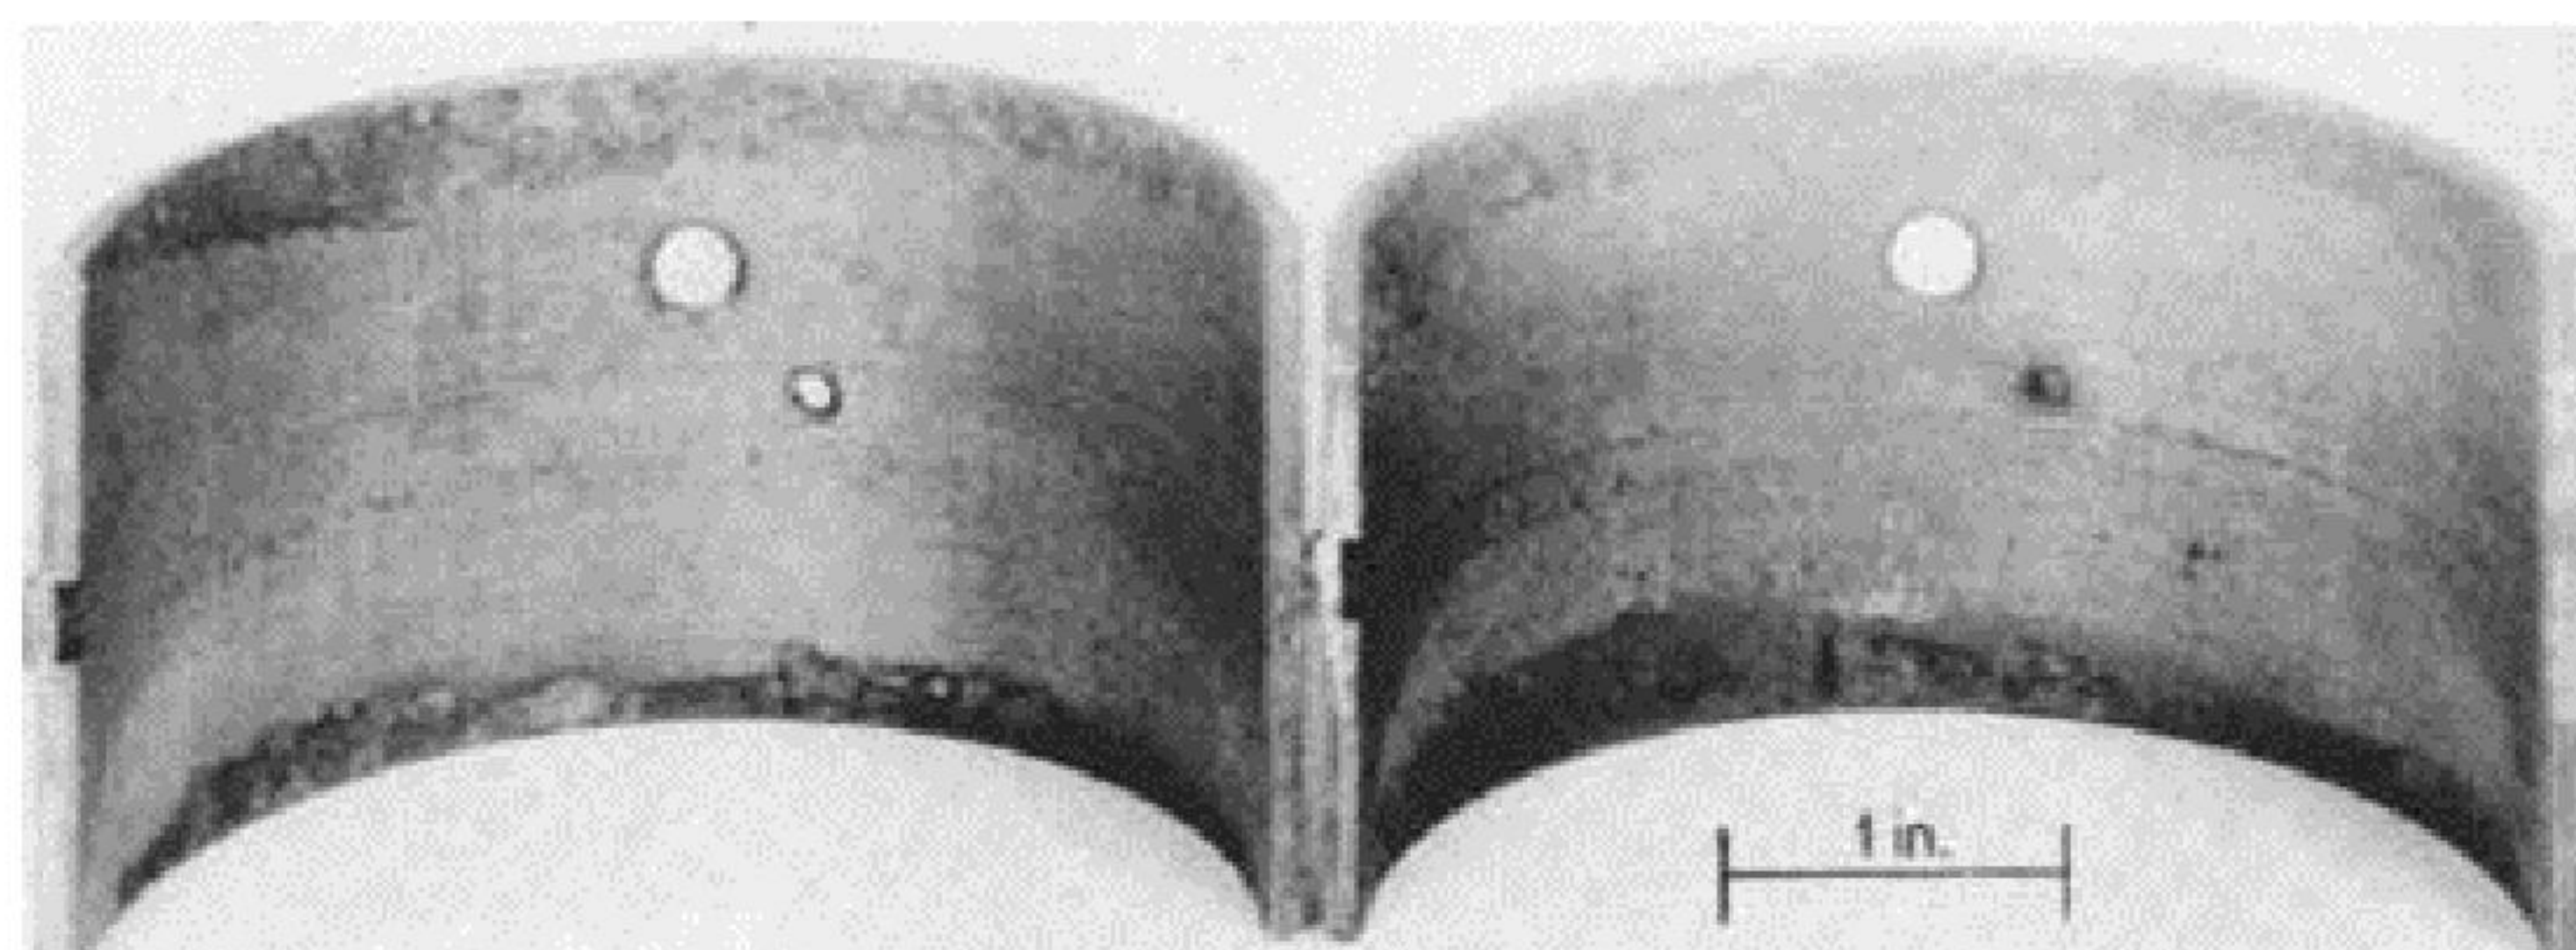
Fatigue caused by an hourglass-shaped shaft.
